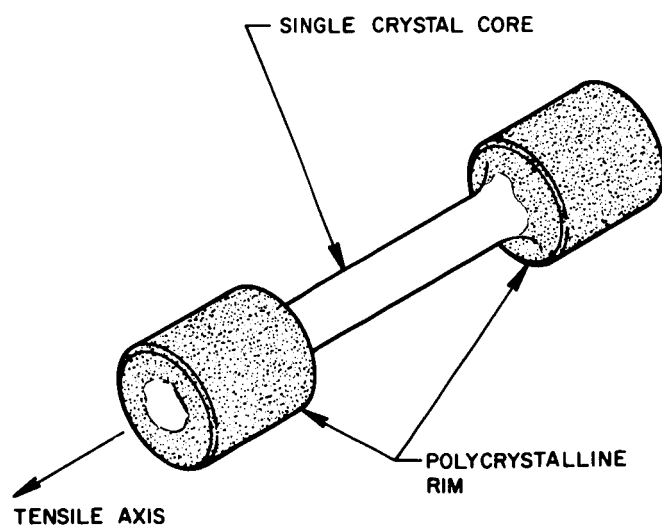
Tensile specimen showing single-crystal core with polycrystalline outer rim
